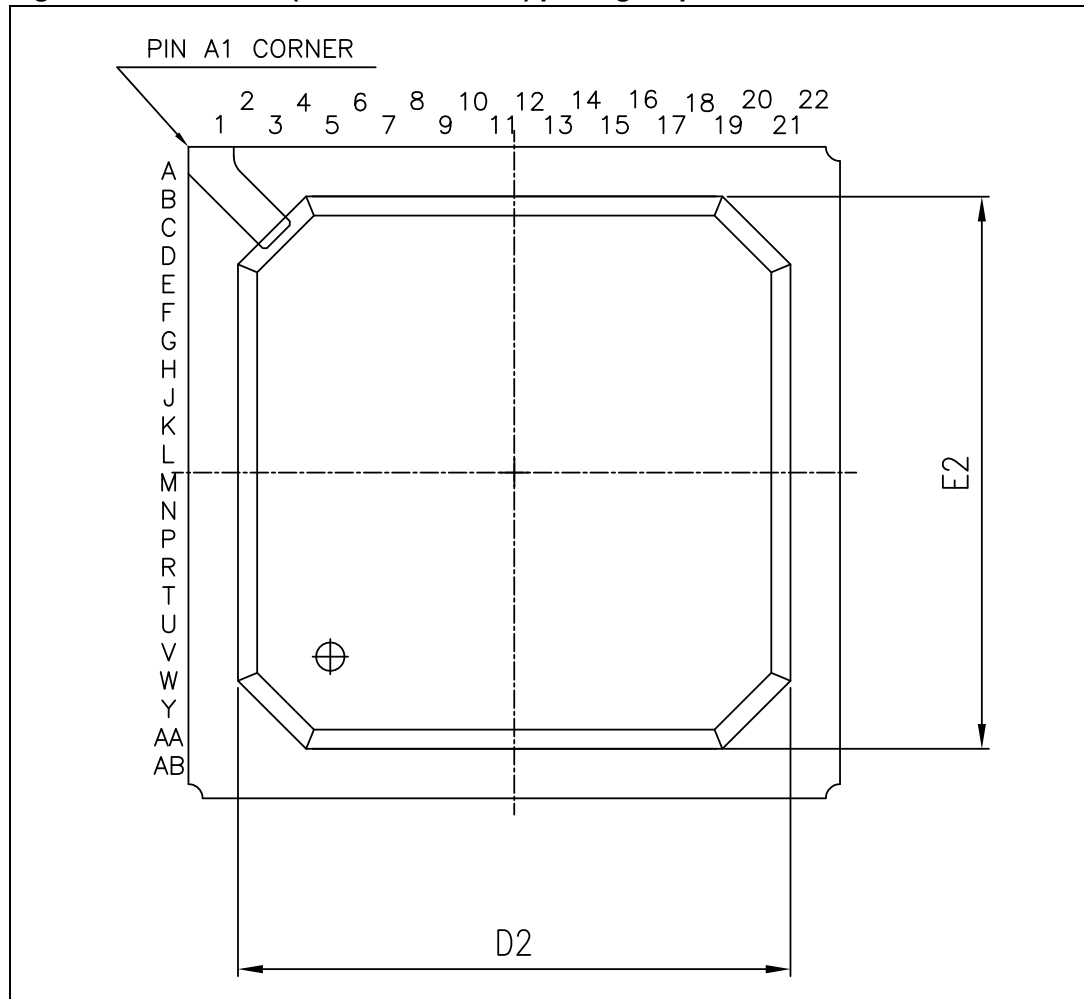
PBGA420 (23 x 23 x 2.06 mm) package bottom view
